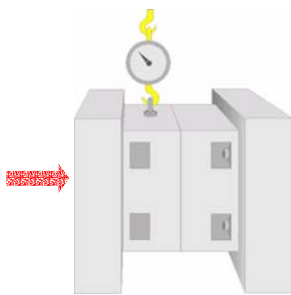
Close with set-up pressure, determine mould height, display of the crane balance shall
